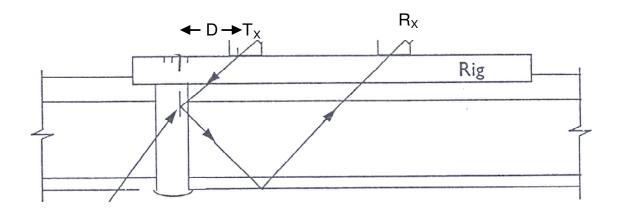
AT weld testing using 45<sup>0</sup> tandem probe
